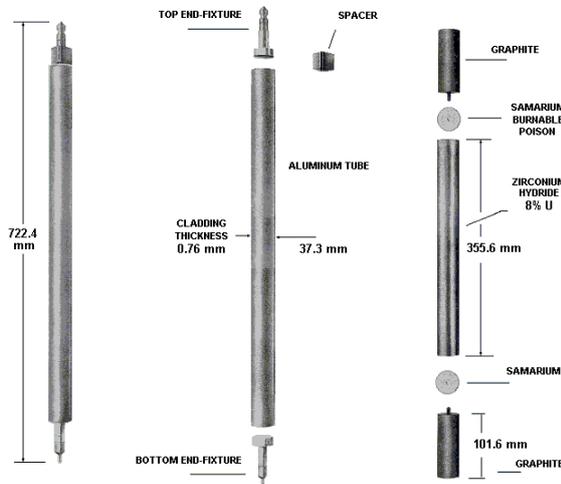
Constructive details of a Triga aluminum-clad fuel element [9].
